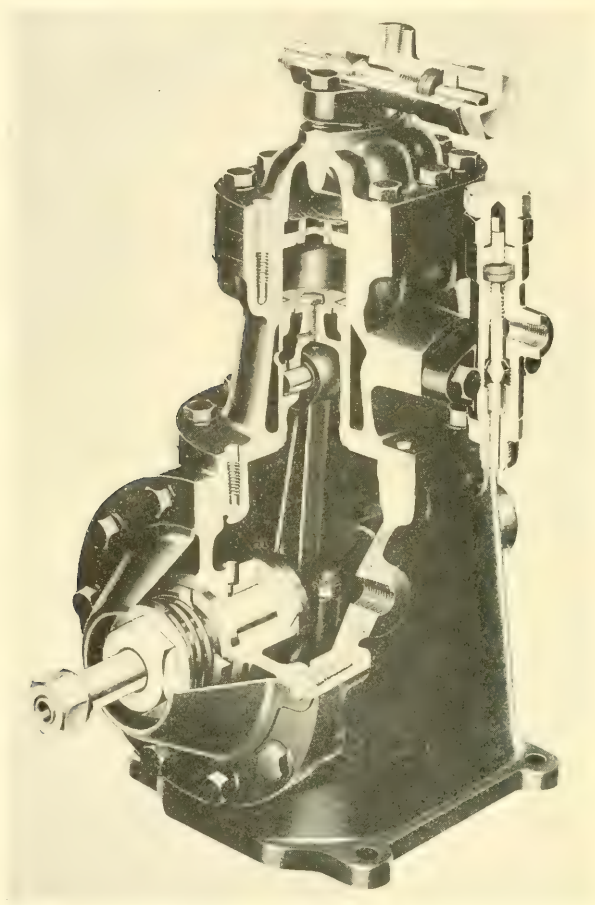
CUTAWAY VIEW OF SERVEL COMPRESSOR SHOWING MOVING PARTS AND SYLPHON PACKING.
